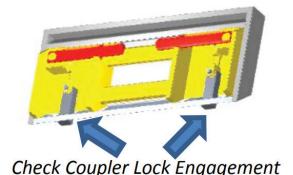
B QUICK ATTACH COUPLER LOCKED TO ATTACHMENT BRACKET
